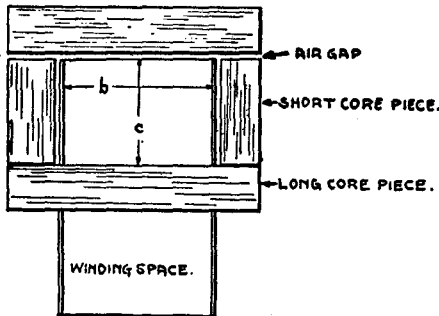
CORE ARRANGEMENT FOR FILTER CHOKE COILS
